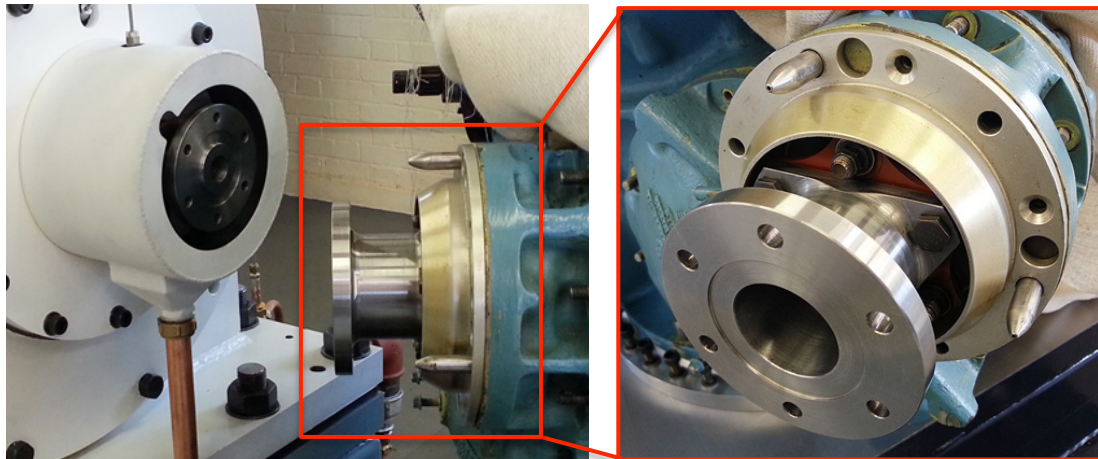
Coupling Flange for Mating Speed-Increasing Gearbox to MGB (Source: Author)
